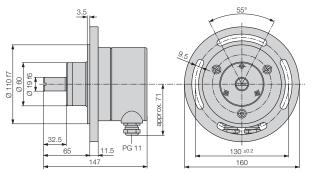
KINAX WT 707 with screw terminals, cable glands and flange.
